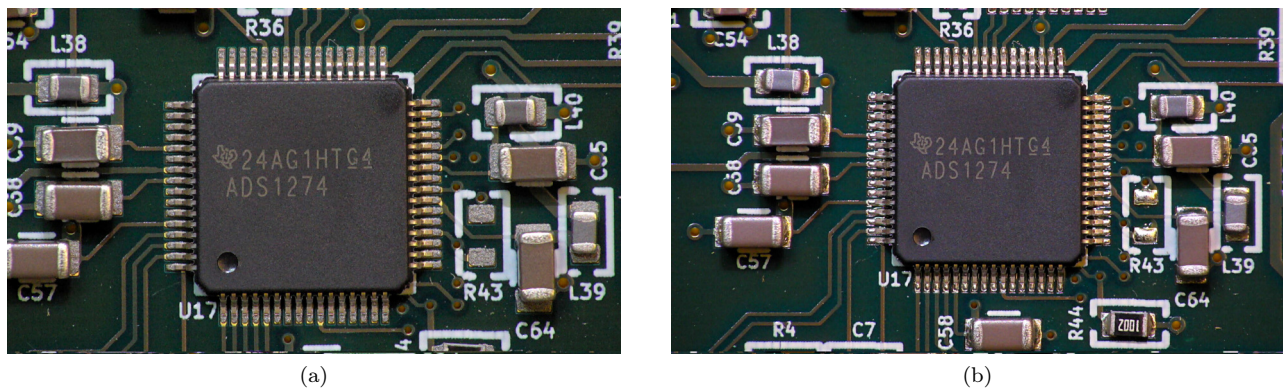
Close-up view of the ADS1274 ADC on the PCB before (a) and after (b) reflow soldering.
